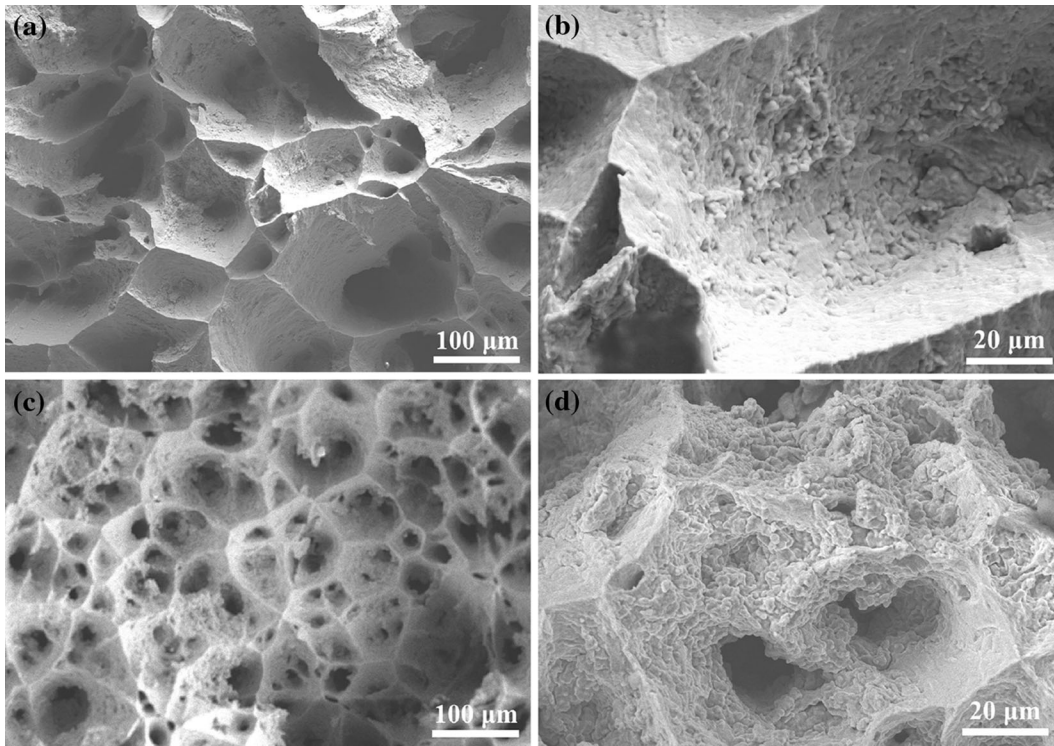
Fracture surfaces of specimens tested at 1373 K (1100 °C): (a) and (b) 160 μm , (c) and (d) 37 μm .
